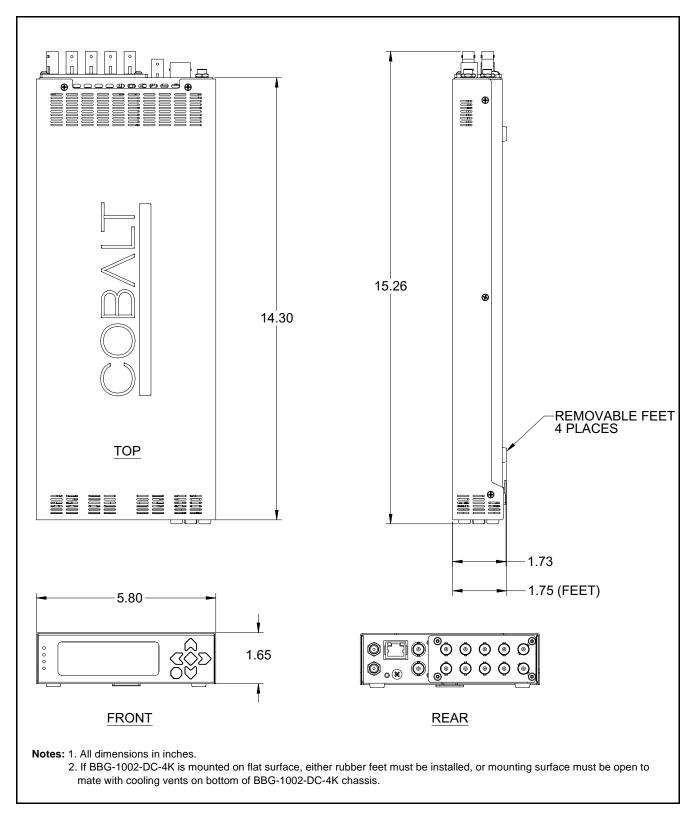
BBG-1002-DC-4K Dimensional Details
